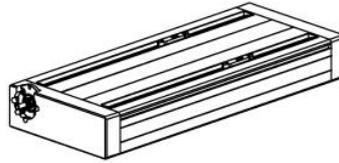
linear unit LES 4, 5, 6 for mounting the carriage
